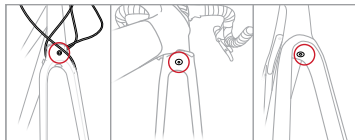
Front fender mounting bolt locations. L-R: front, rear, under the crown.
